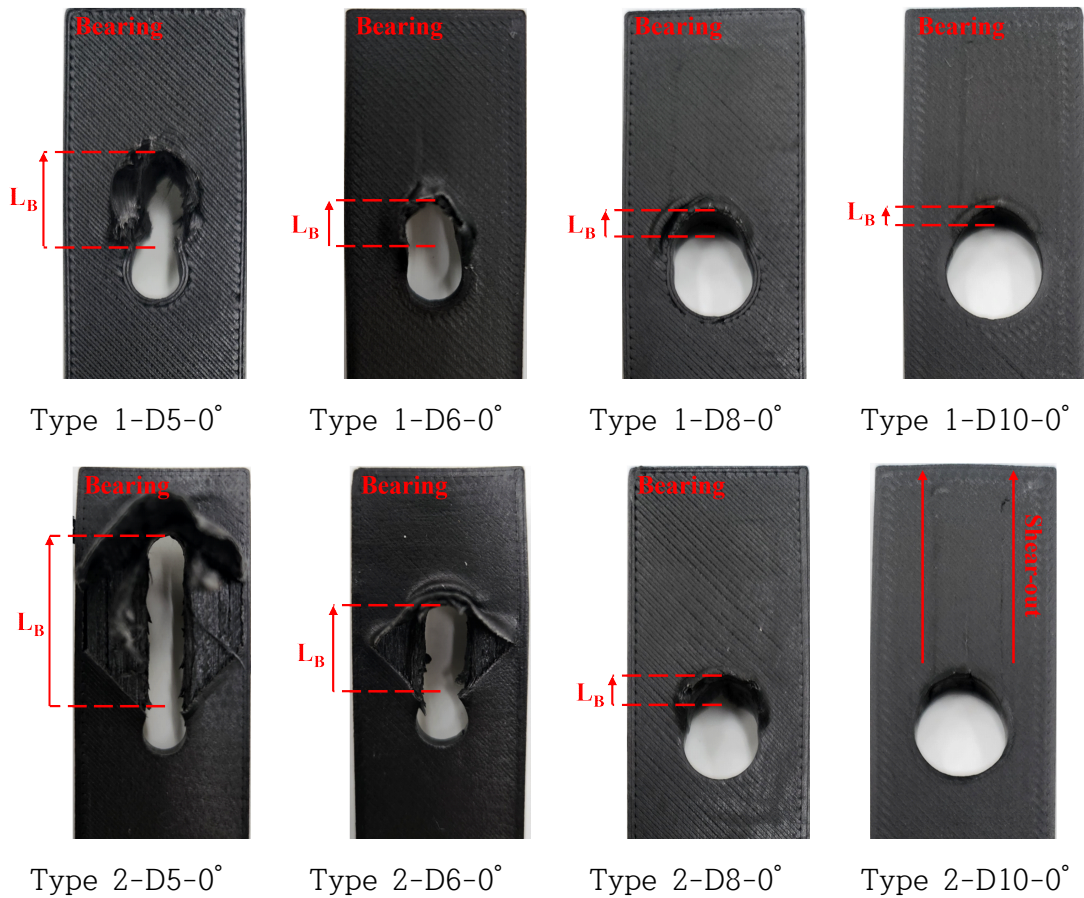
Failure mode of 3D printed bearing specimen(0°)
